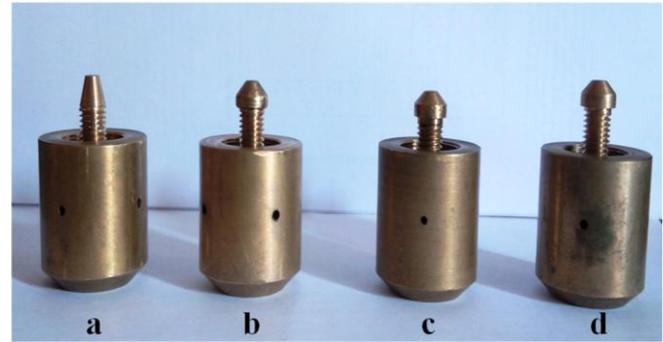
Conical valve a) 30° b) 45° c) 60° d) 90°
